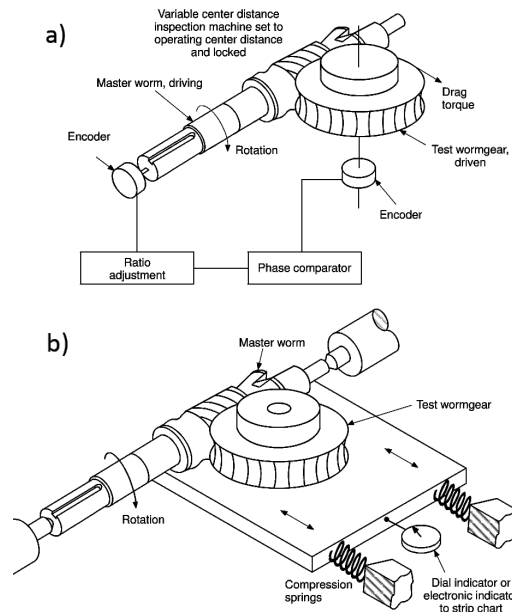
Schematic of worm gear testers (source [29]): a) Single-flank test; b) Double-flank test
